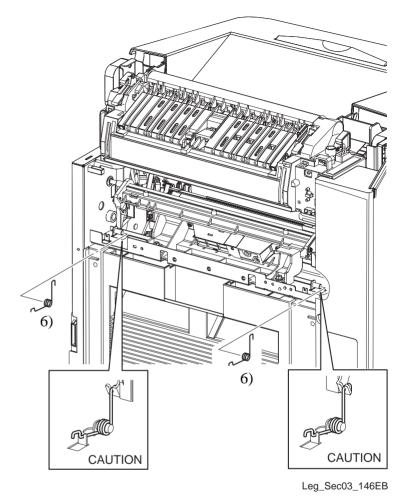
Removal of FRAME ASSY-2ND (1)
